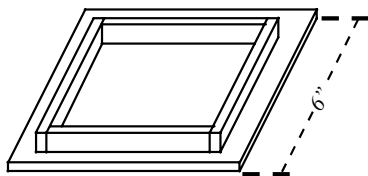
Schematic diagram showing the mold used for curing the resin.
